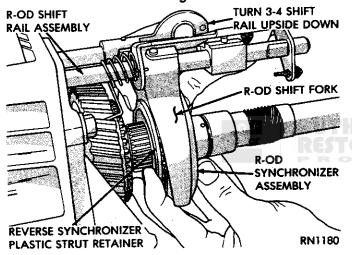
Removing/Installing Reverse-OD Synchronizer, Fork And Rail
